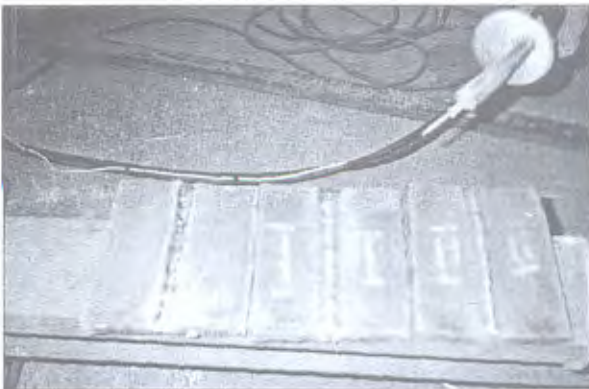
Welded joints of a kiln made with PSh-107V and PSh-107G semi-automatic machines in different positions
